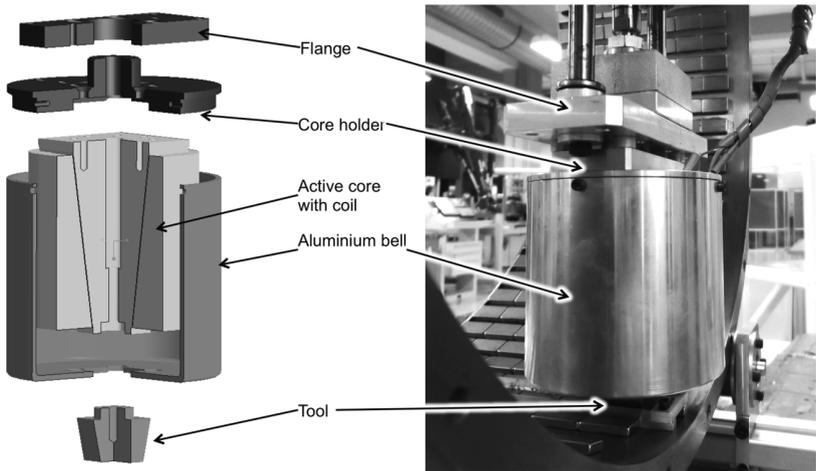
The ELMAG-3 gripper is equipped with an exchangeable tool end to provide flexibility for all magnet shapes.
